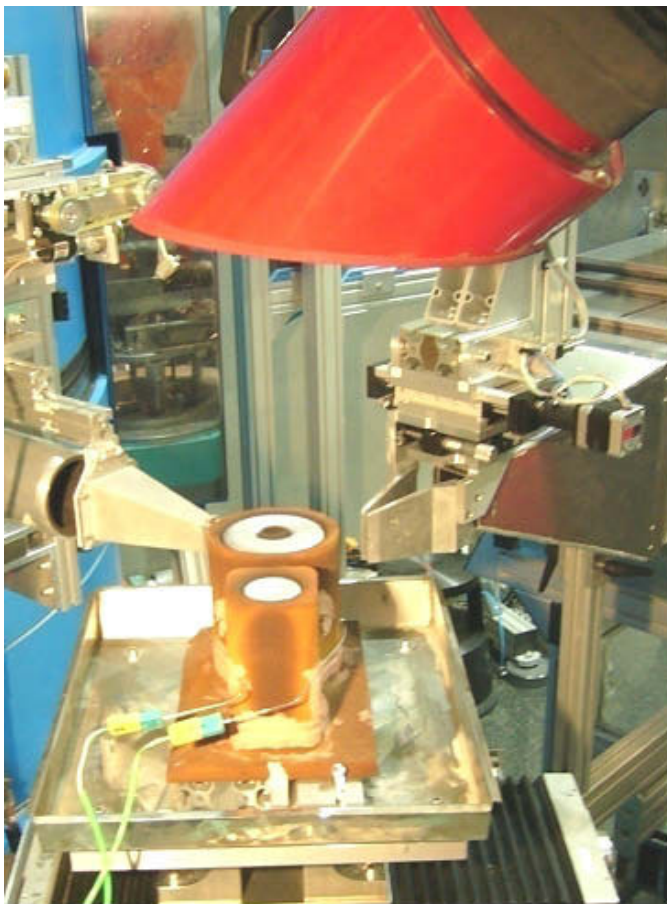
Sand mould after casting the aluminium on the STRESS-SPEC sample table.
